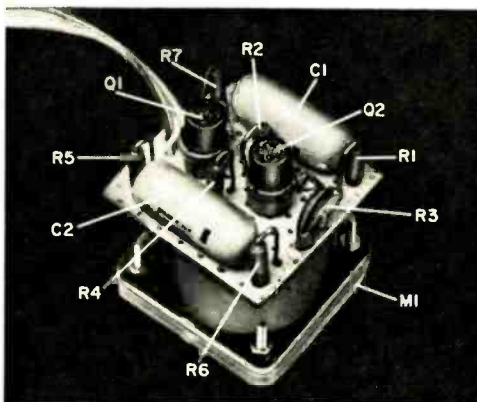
The electronic circuitry is first put together on a suitable sized circuit board, and the assembly is mounted on the back of the meter case. You could also house the circuit board separately.
